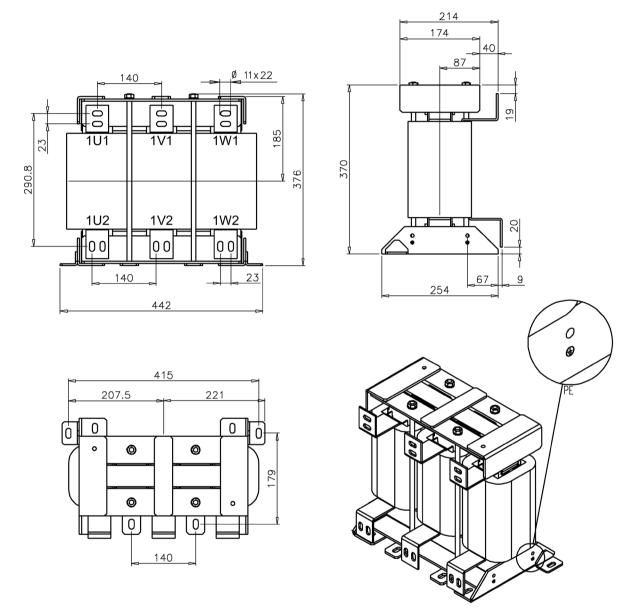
Dimension drawing of line reactor 6SL3000-0EE38-8AA0, all dimensions in mm
